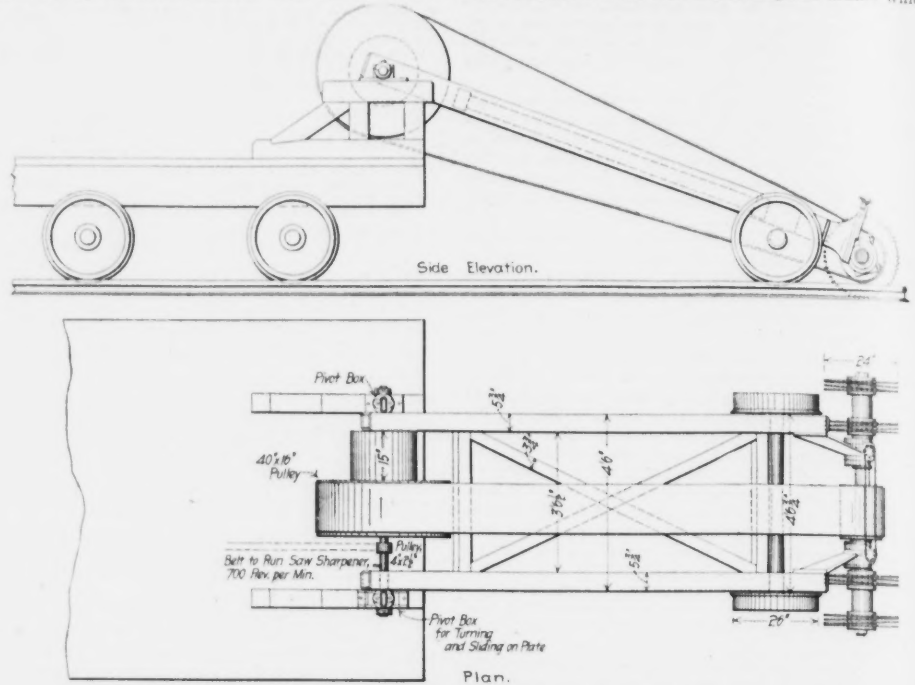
TIE-SPOTTING MACHINE; FLINT & PERE MARQUETTE R. R.
